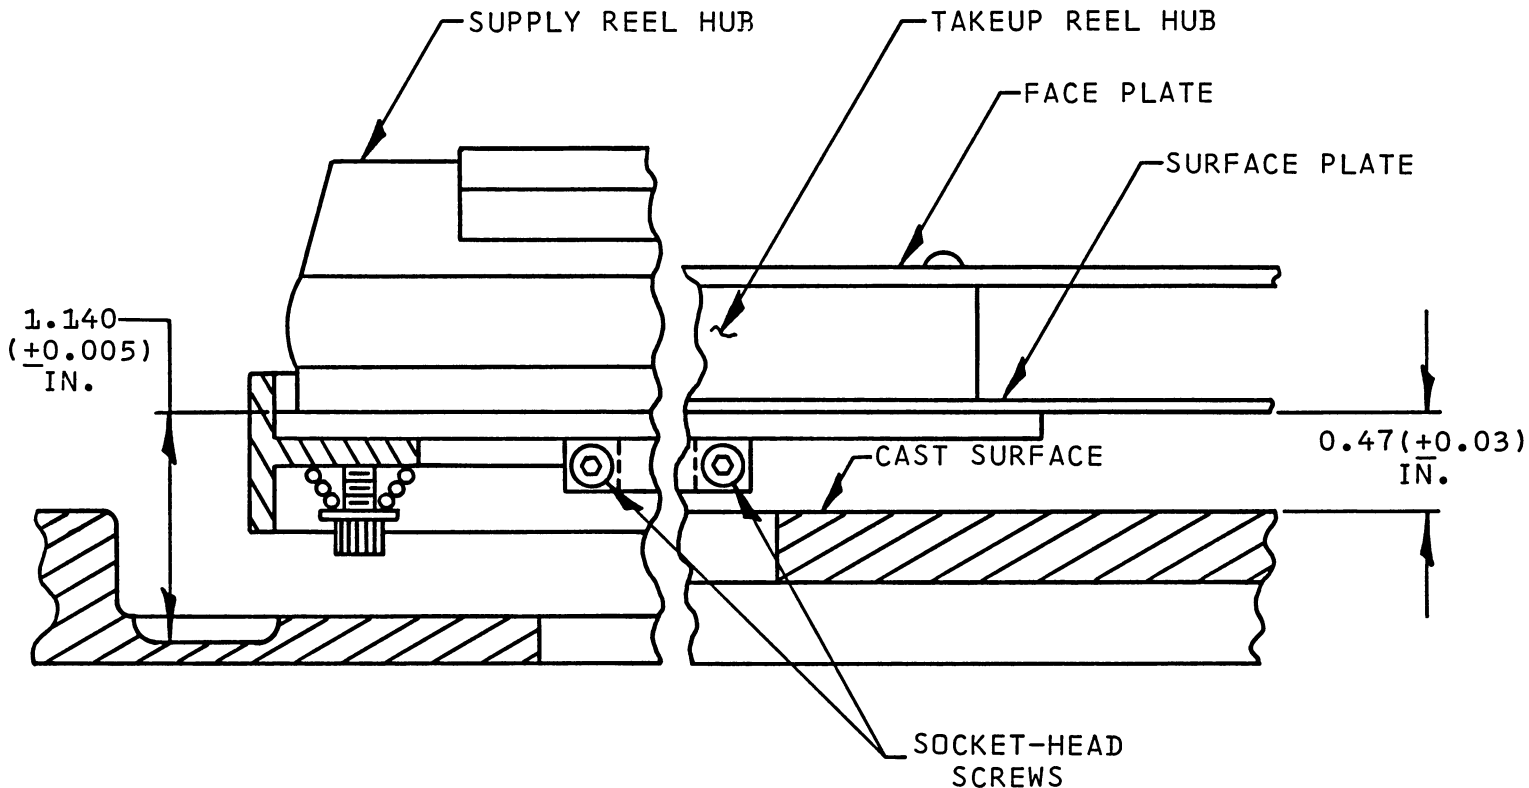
Reel Hub, Showing Adjustment Dimension
